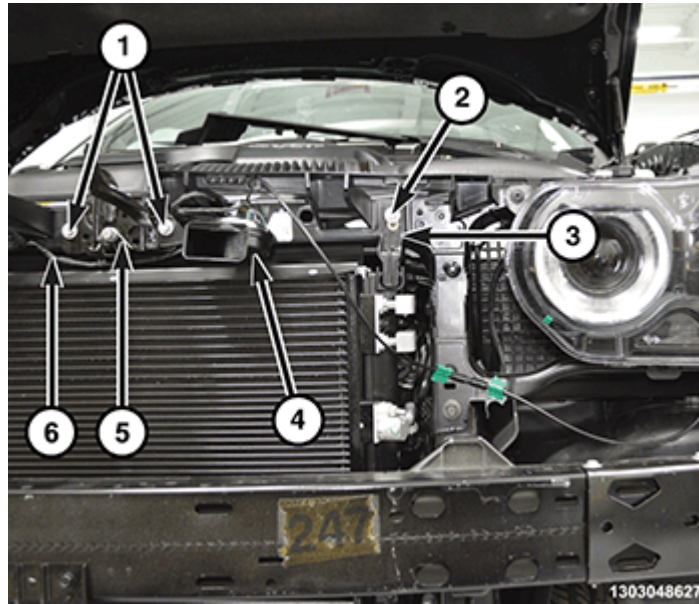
Bolts, Upper Radiator Isolator, Horn, Hood Latch & Wire Harness
